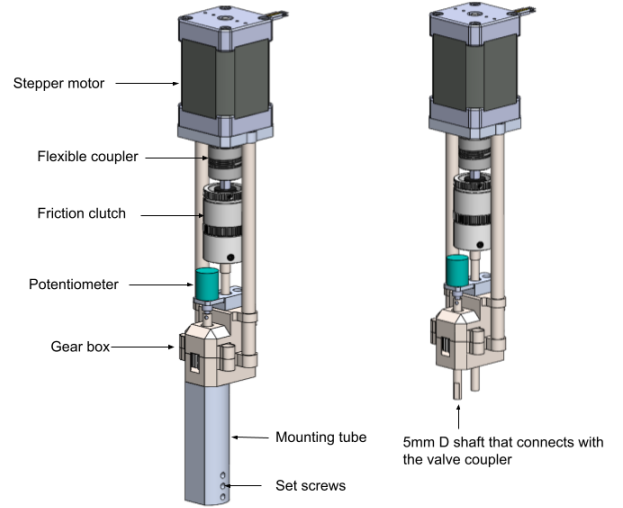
The run valve assembly includes a custom gearbox, friction clutch, and rotary potentiometer. The design offsets the motor from the vertically moving target ladder and mounts to the run valve shaft using three 8-32 set screws. A rotary potentiometer provides absolute valve position feedback. The right side image shows the 5 mm D shaft
